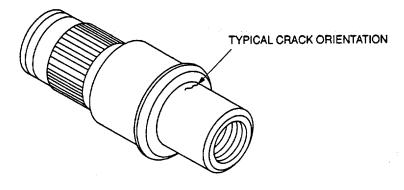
Tail Rotor Control Tube and Quill - Spacer.
